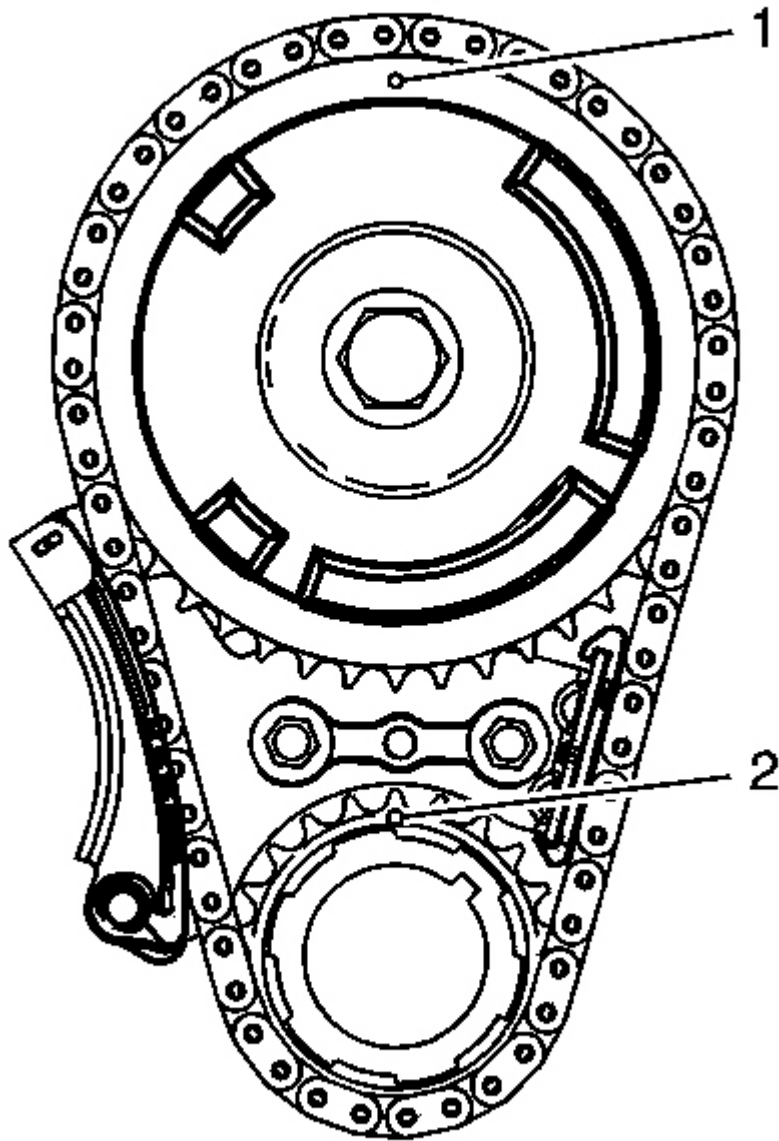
View Of Camshaft & Crankshaft Sprocket Alignment Marks In 12 O'clock Position
